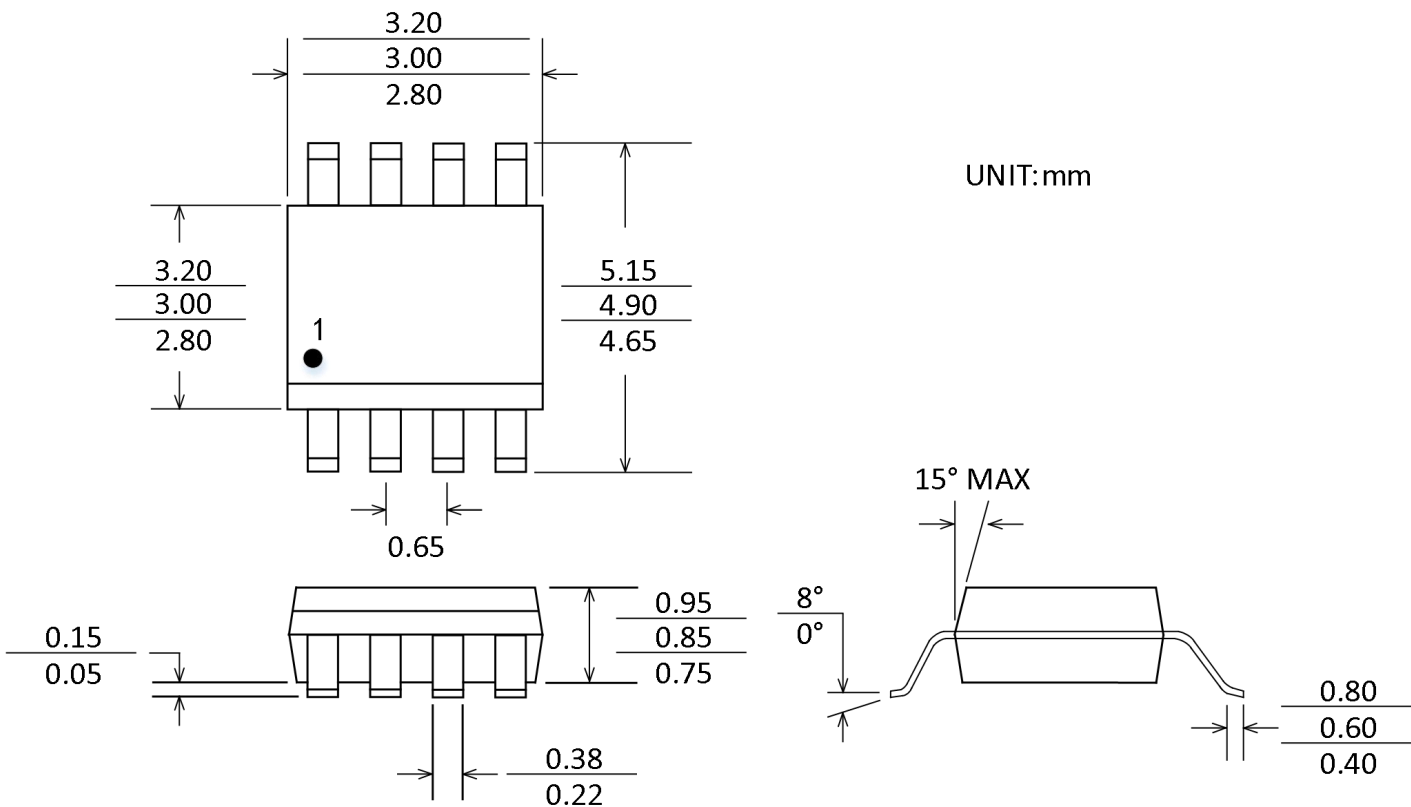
8-Lead Mini Small Outline Package [MSOP]
